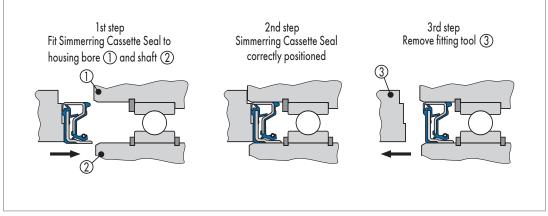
Fitting of Simmerring Cassette Seal – Case C ("parallel")
